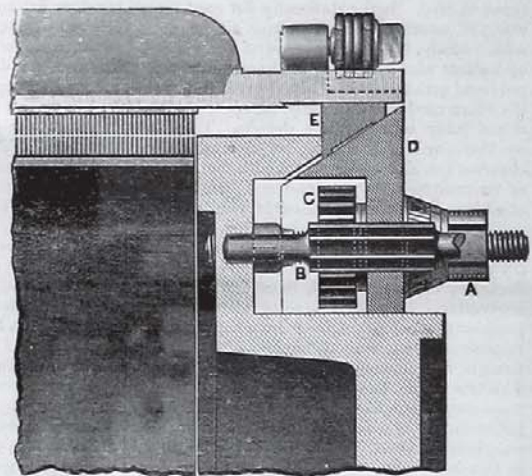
CROSS SECTION OF BEND, AND NEW SETTING ARRANGEMENT.
